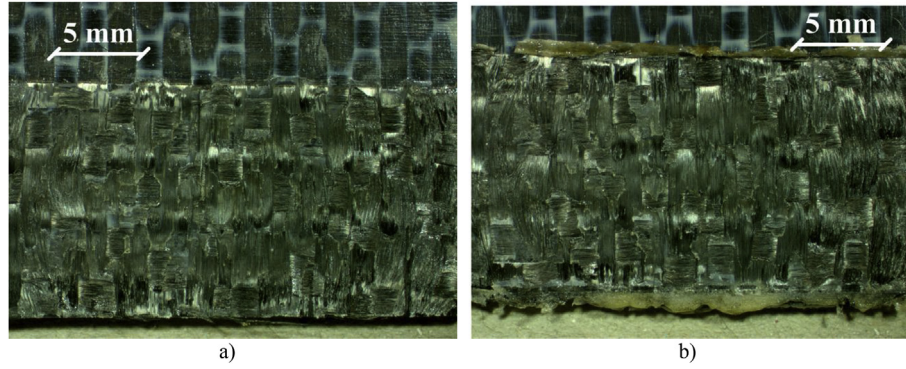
Fracture surfaces of the a) bottom and b) top adherends of specimen B02-02 (batch 2).
